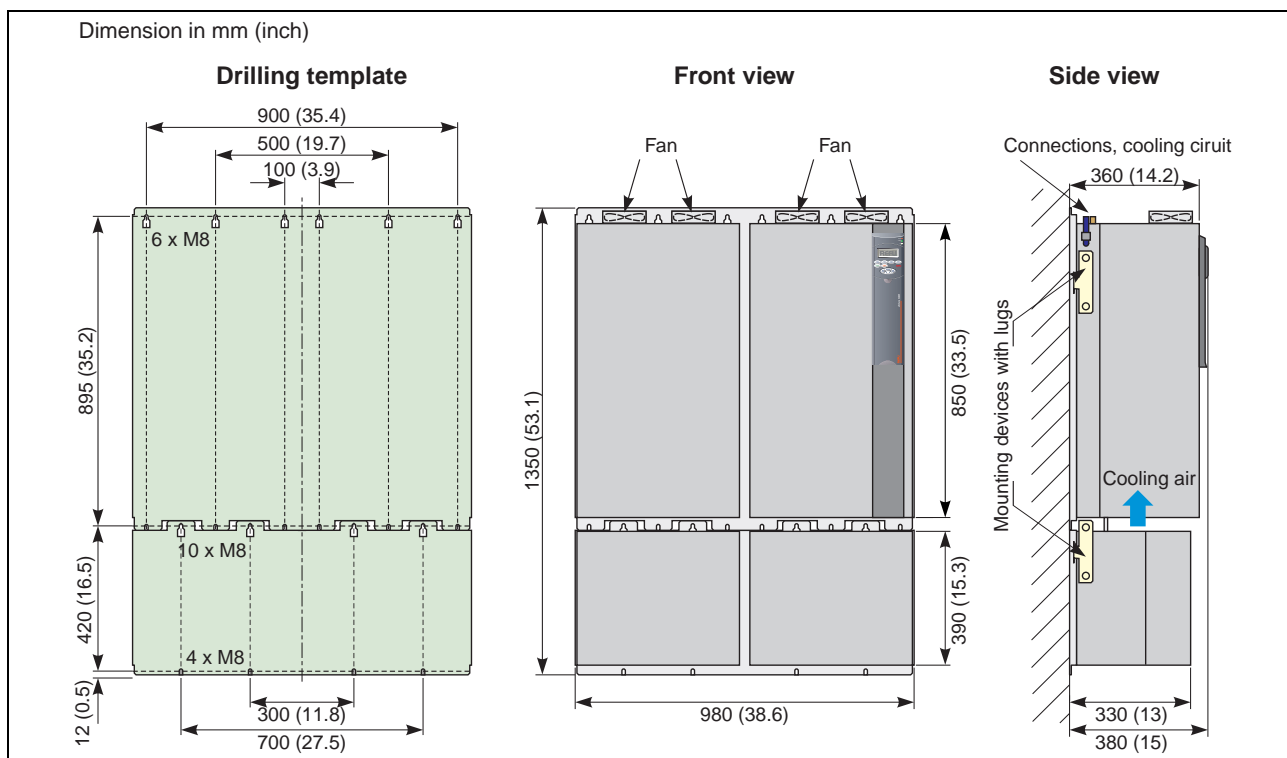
Dimension drawing converter size class H without heat exchanger
